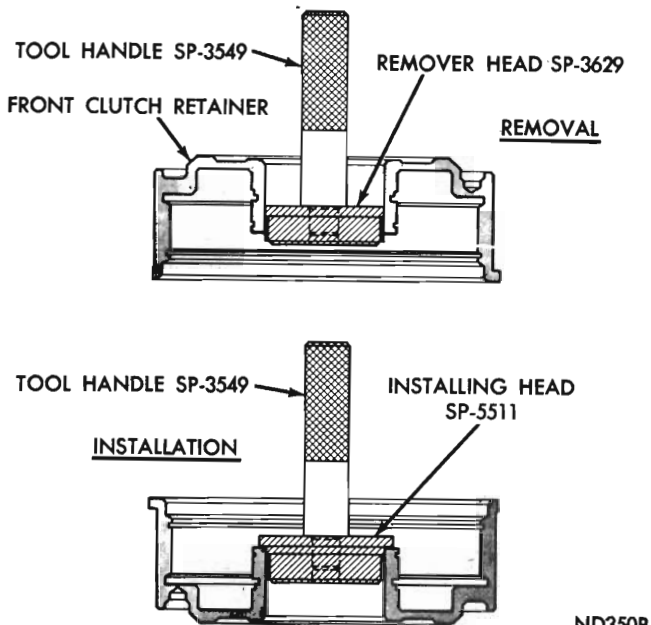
Replacing front clutch retainer bushing (A-727)
